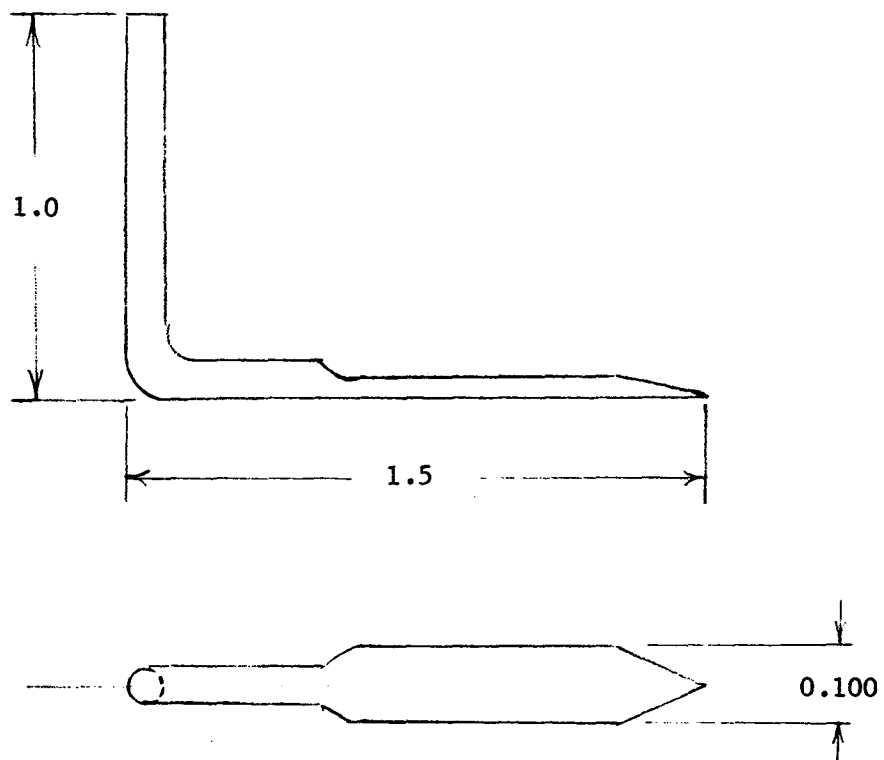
Inspection tool: insert flattened leg between explosive cord and acrylic and rotate 1-inch leg down to position the 0.100 dimension perpendicular to the acrylic.
